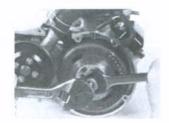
Use a suitable screw puller to remove the flywheel.
